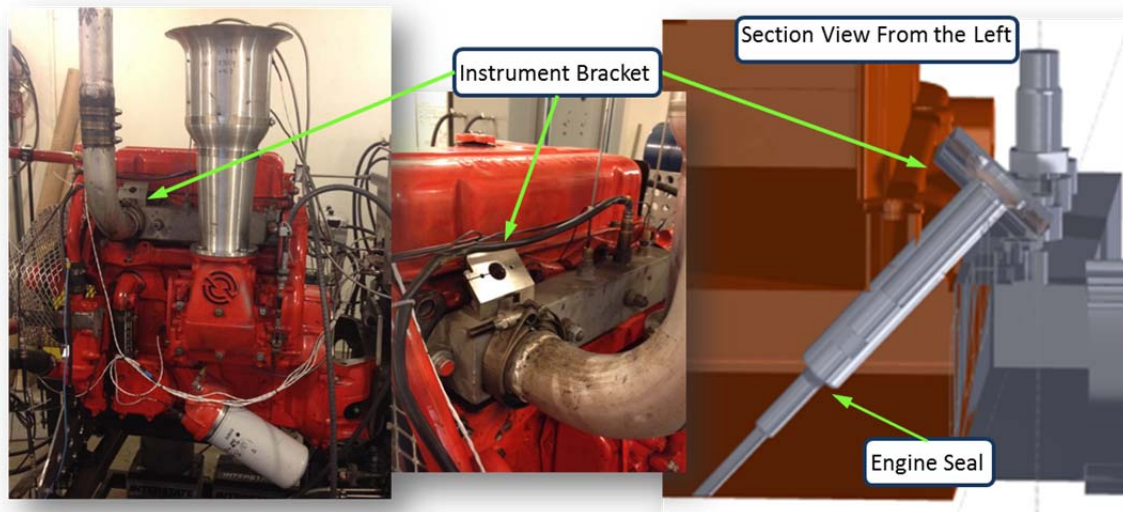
Photos of the instrument bracket mounted to the Detroit Diesel 3–53 and section view, produced in Solidworks, from the left side showing the complete sapphire rod assembly mounted in the engine.
